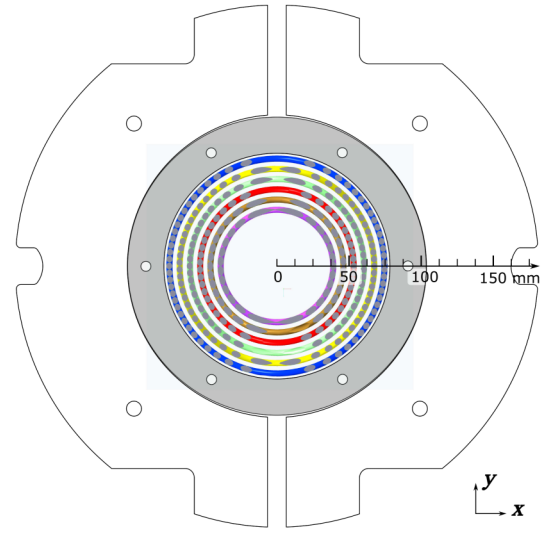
The view of the six nested layers projected to the x - y plane. Also shown are the aluminum shell next to Layer 6 and the iron yoke outside the shell. The scale is in mm.
